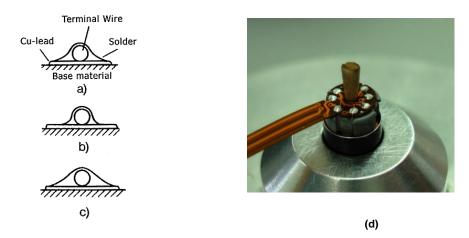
Schematic representing the amount of solder. (a) optimal. (b) minimum. (c) excessive. (d) Picture of good solder realized on an ADM1220 stepper motor from FAULHABER.
